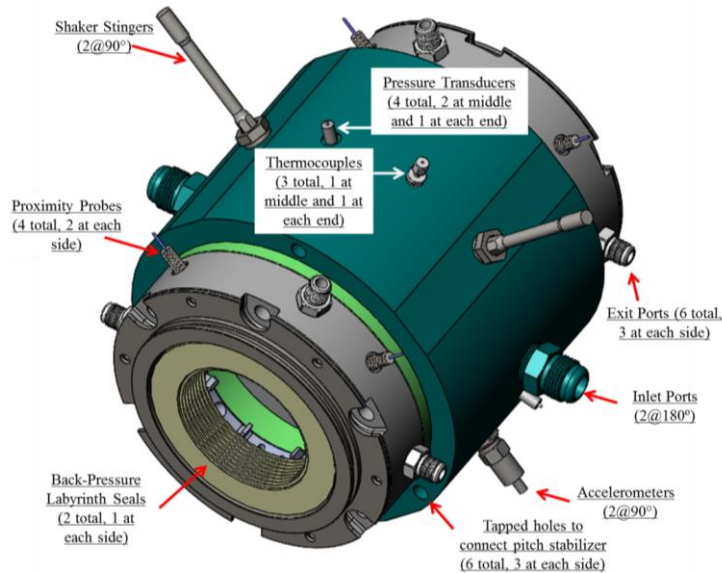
3-D model of the stator assembly. Reprinted with permission from [21]
